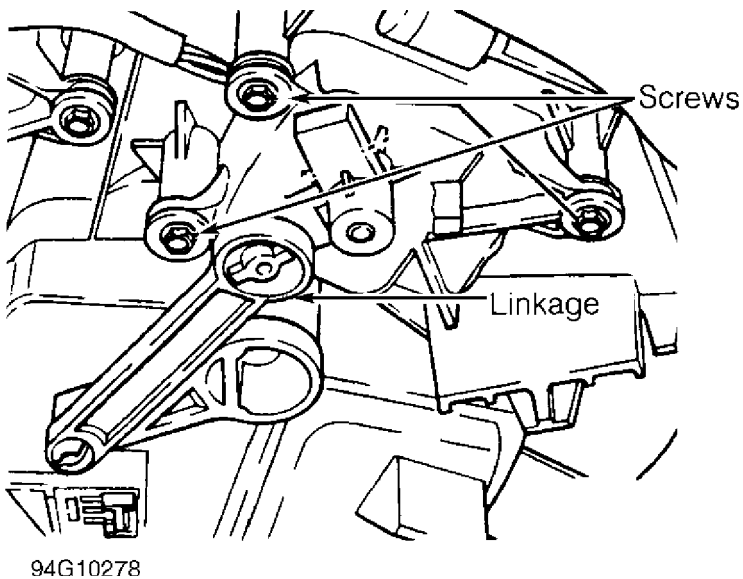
Removing Temperature Regulator Flap Motor (90 CS)
